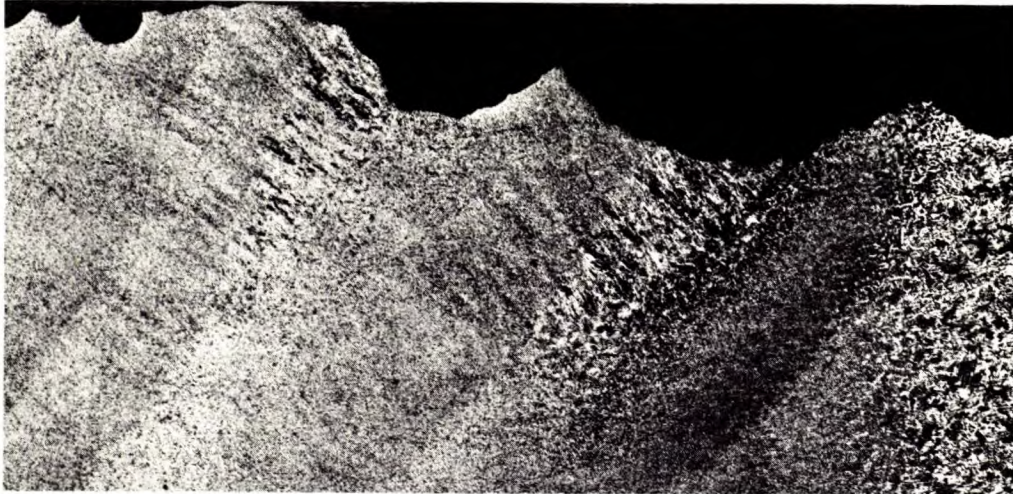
At lower edge of longitudinal weld, on seawater side. Mag. X11.
